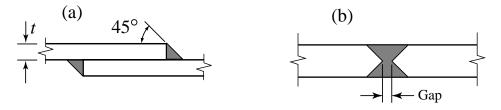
Welds in pressure vessels: two configurations.
